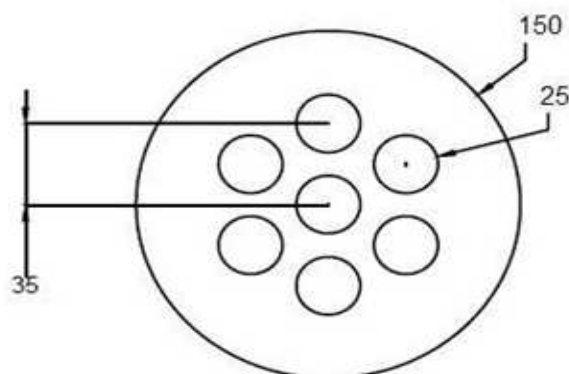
2D Drawing of the Heat Exchanger Cross Section View ^{1}
